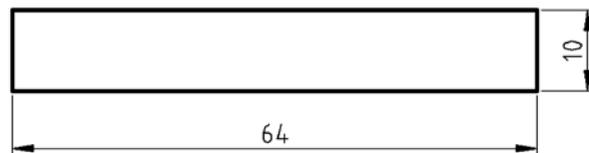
Geometrical parameters of the used model – dimensions are in millimeters
